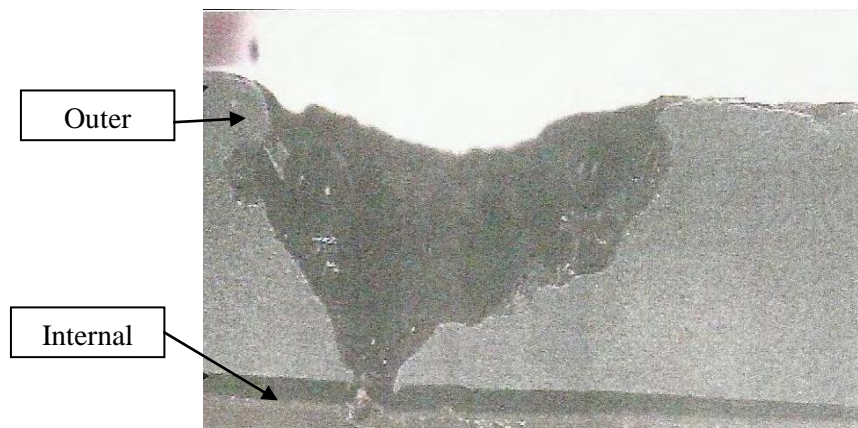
Cross-section view of E-105 through wall pit [6]
